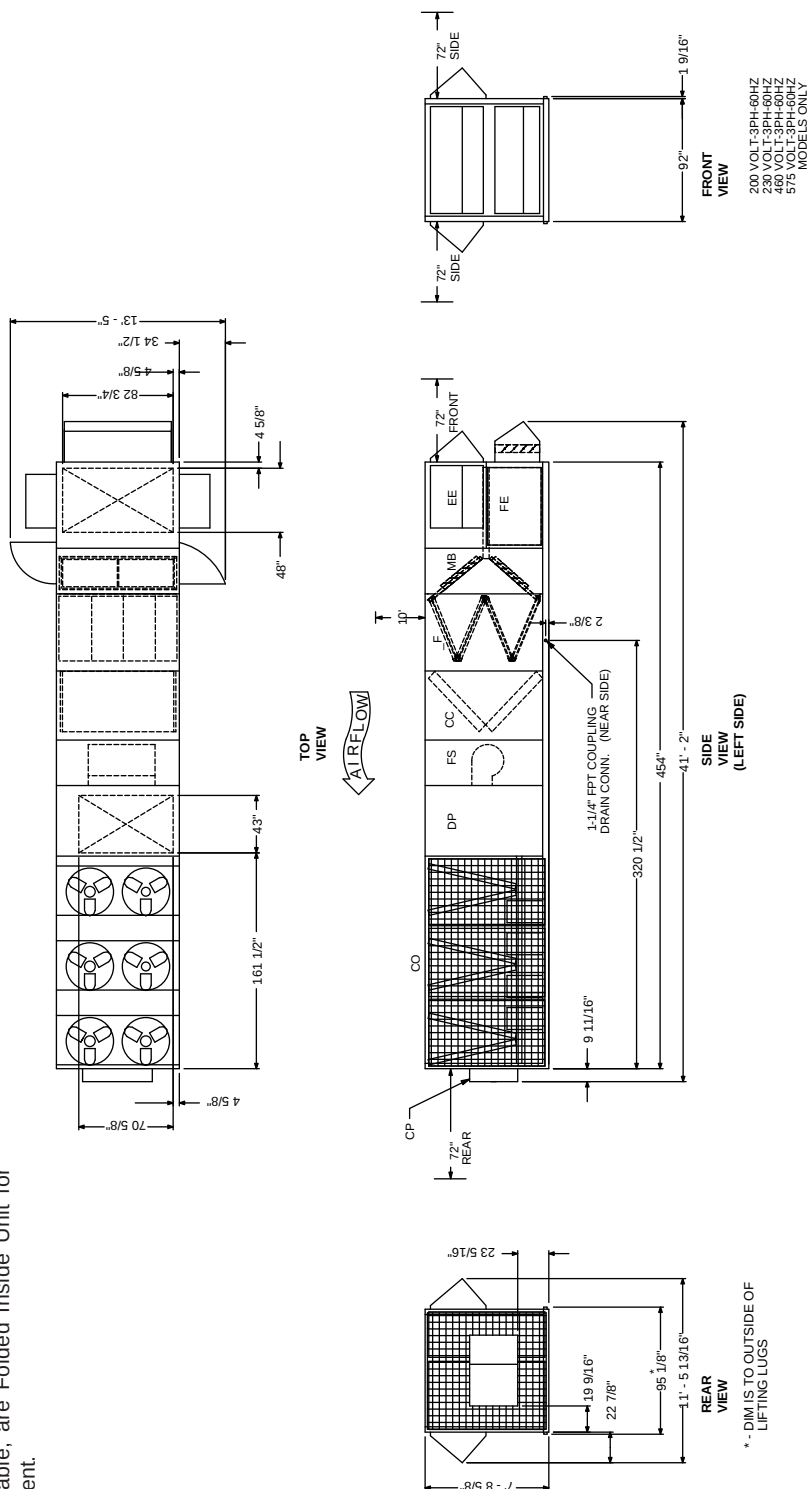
GENERAL ARRANGEMENT DRAWING
